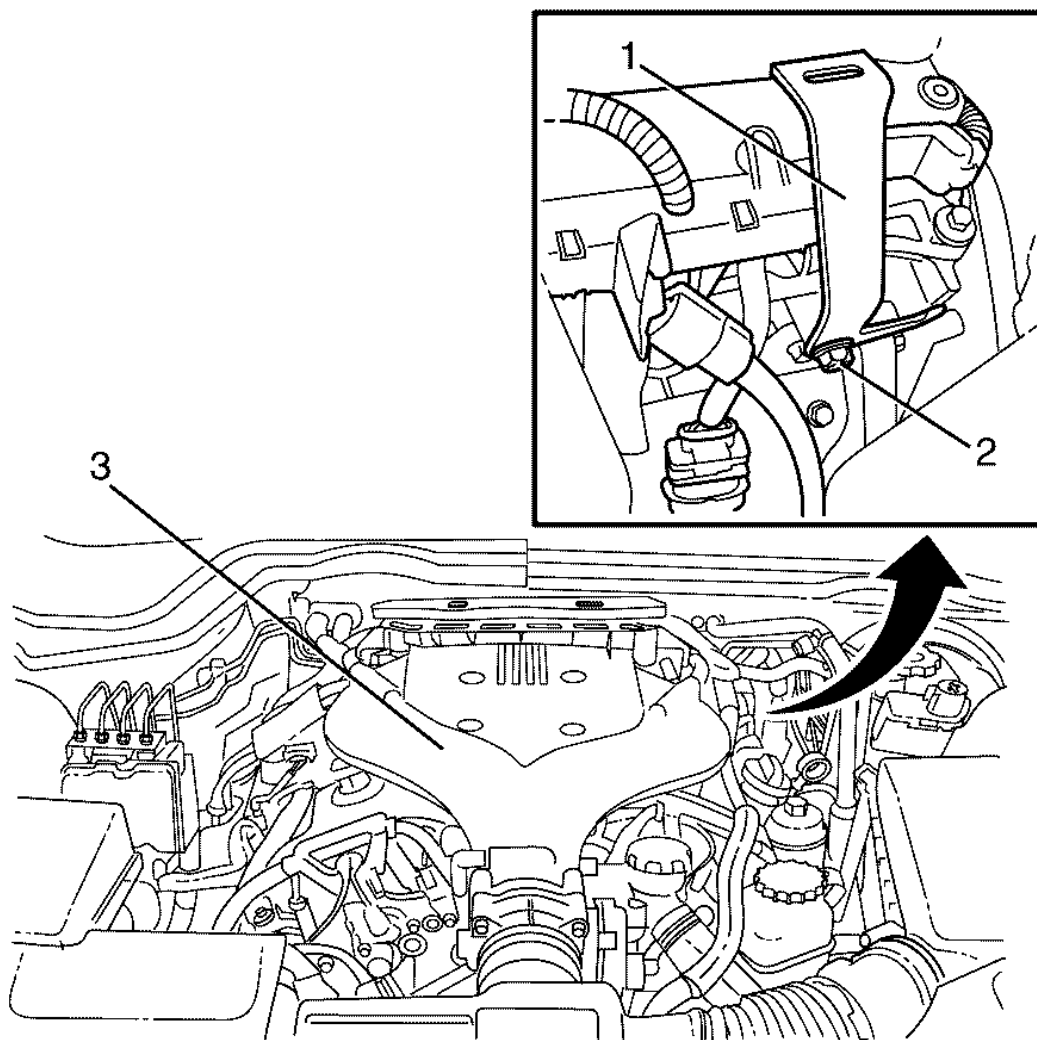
Upper Intake Manifold Sight Shield Bracket To Engine Assembly Bolt
